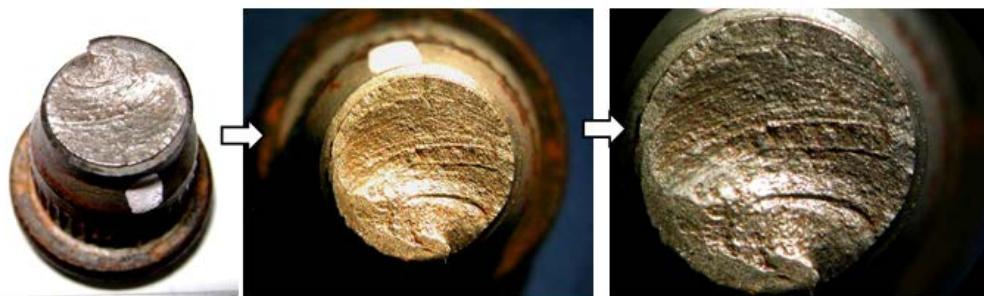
Fracture surface obtained from the broken wheel stud A
